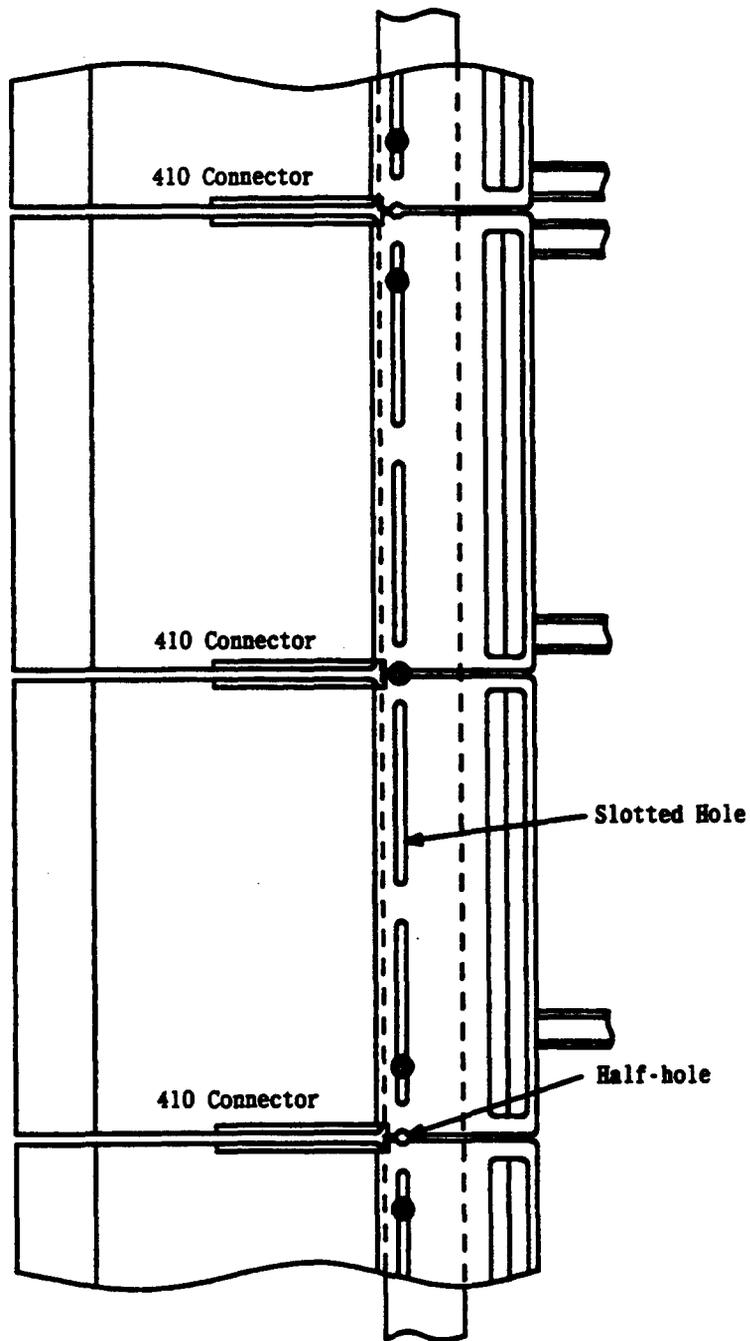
Mounting Arrangement for the 410- or 410M-Type Connectors Using Existing Mounting Holes
